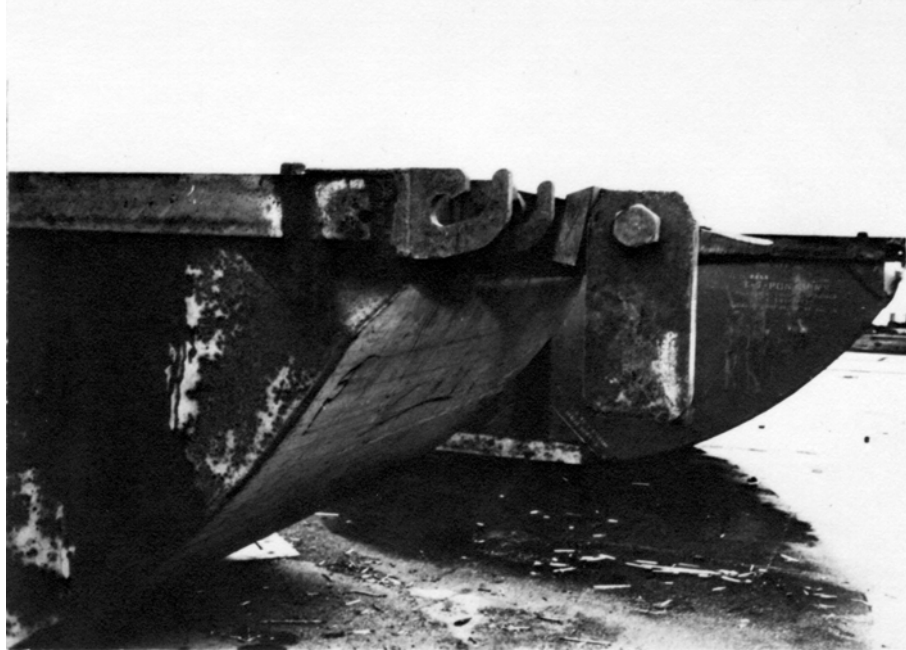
Open type pad eye which receives free end of flat wire rope connection, welded to one end of outboard angle of offshore causeway section
